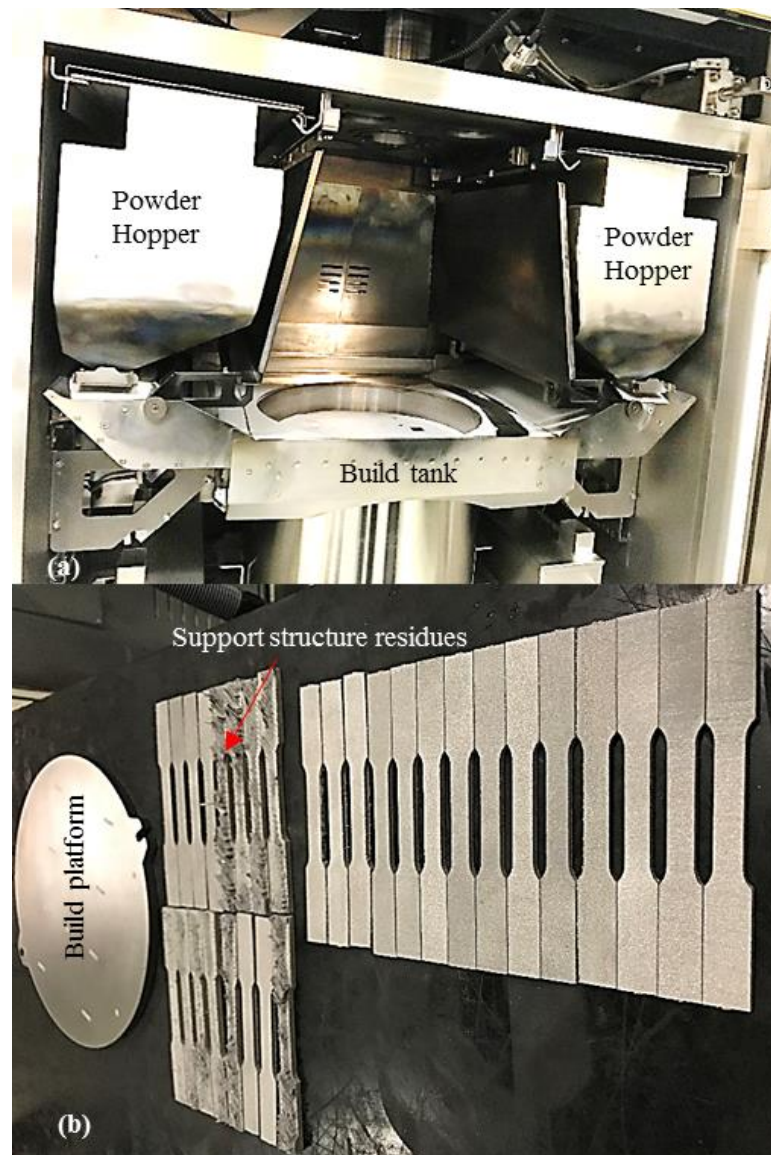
Arcam Q20 Plus machine and manufactured test specimens. (a) Interior view of the machine (b) Manufactured tensile test specimens and build platform.
